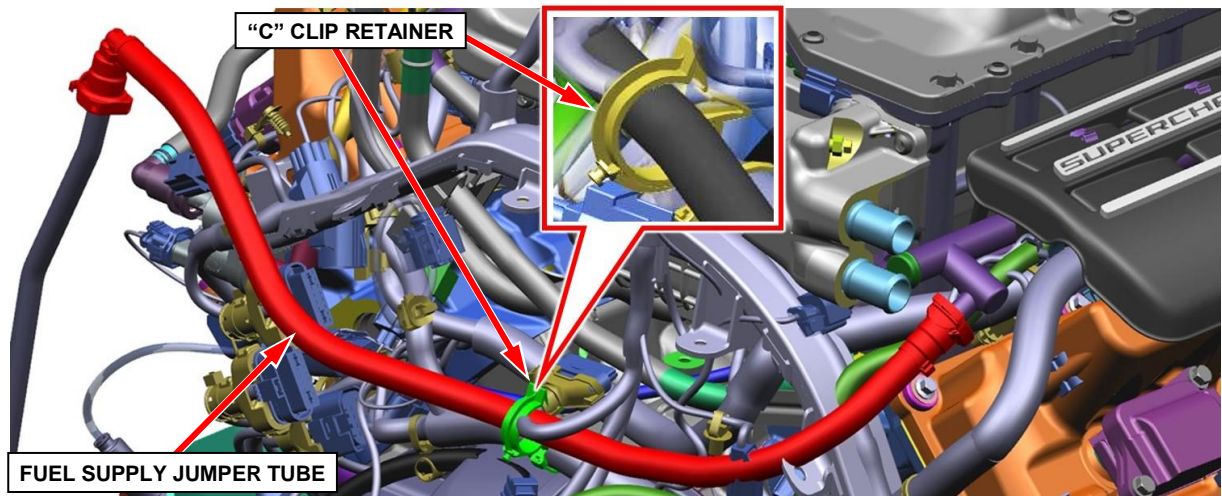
Fuel Supply Jumper Tube “C” Clip Retainer
